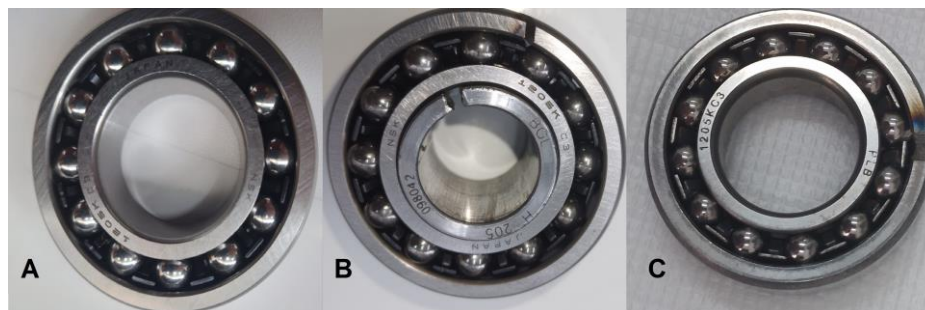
Bearing Damage States: a) Healthy; b) Light Damage; c) Heavy Damage.
